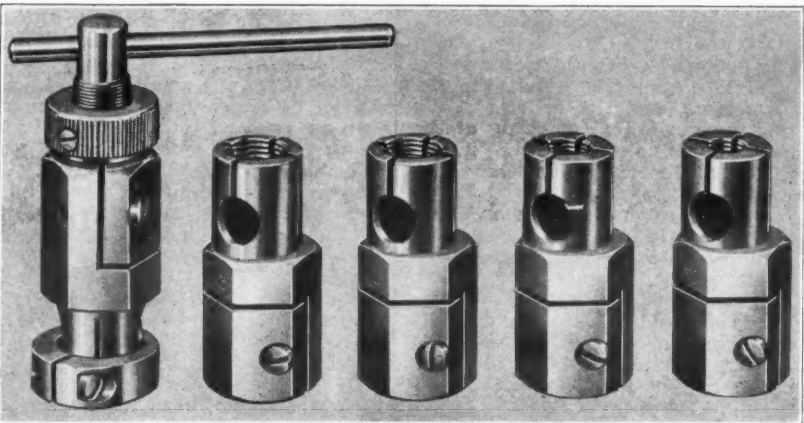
Reseating and rethreading tools for reconditioning male threads.
